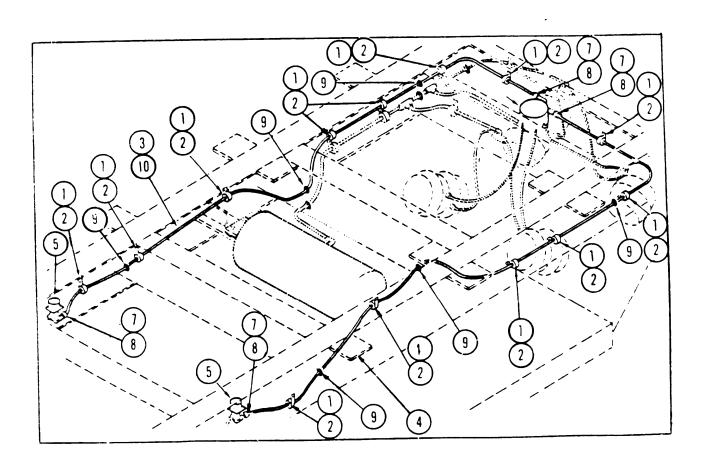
Trailer Air Brake Tubing Sections Between Air Cleaner Assemblies and Relay Valve (ARMY)
